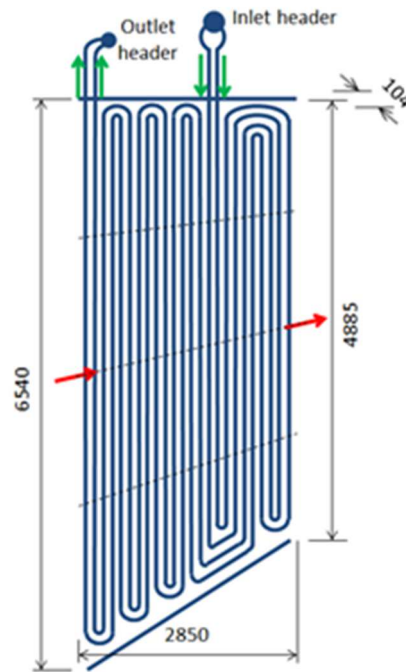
Schematic of the layout of a single tubesheet of the superheater [2].
